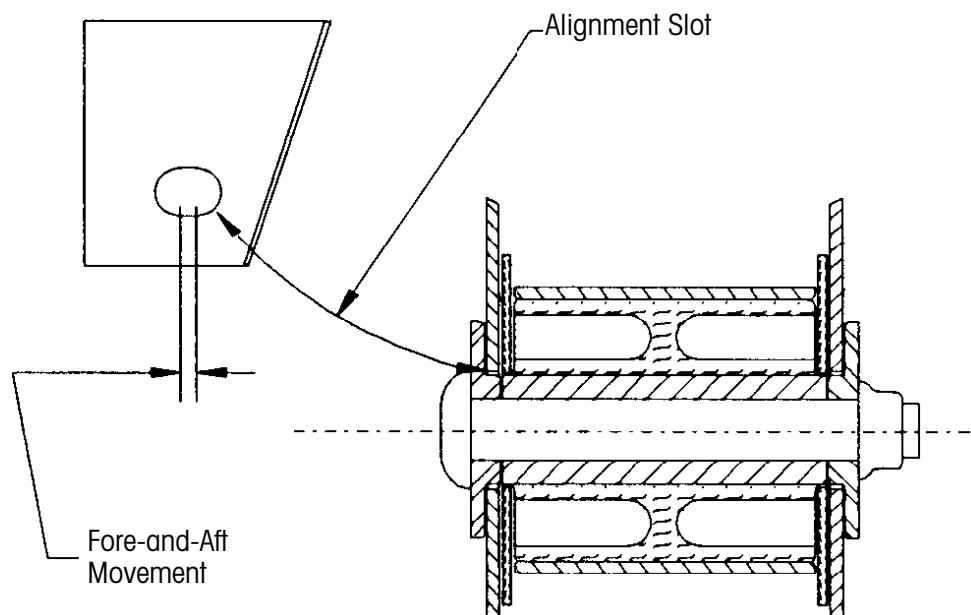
Fore-and-aft movement shown on the welded-collar type frame bracket
